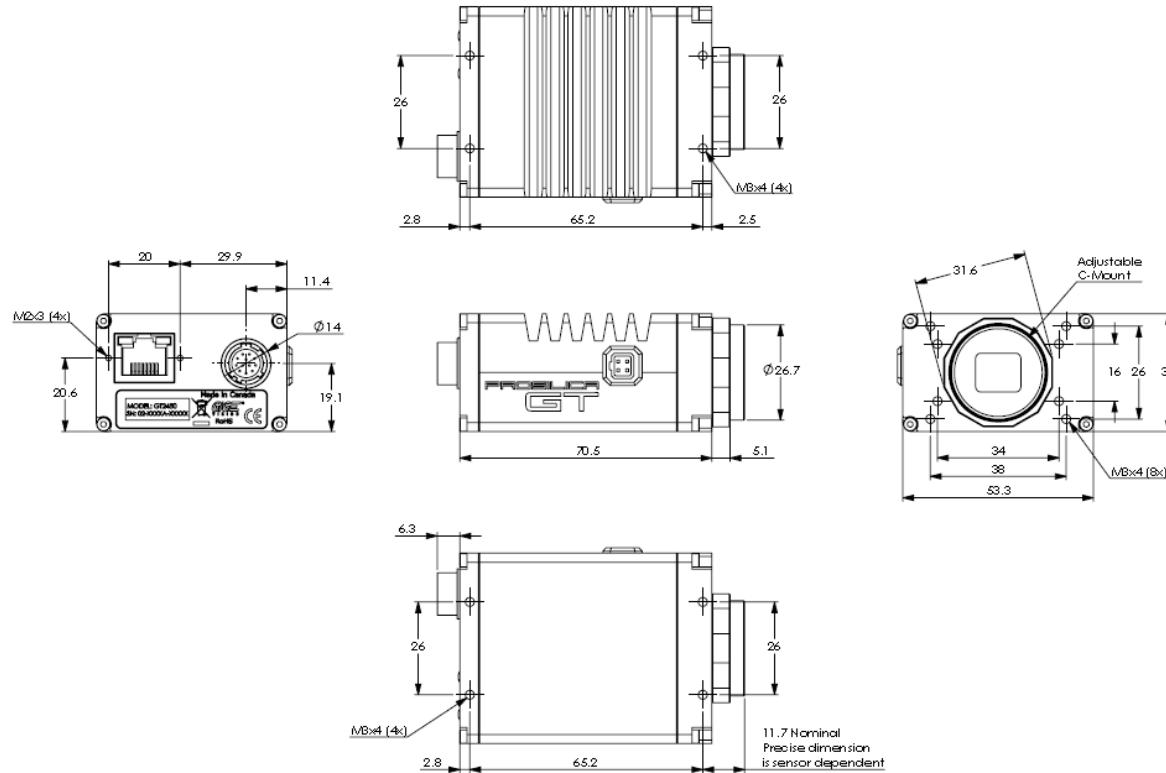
Prosilica GT mechanical dimensions for GT660, GT1290, GT1380, GT1600 and GT2450
